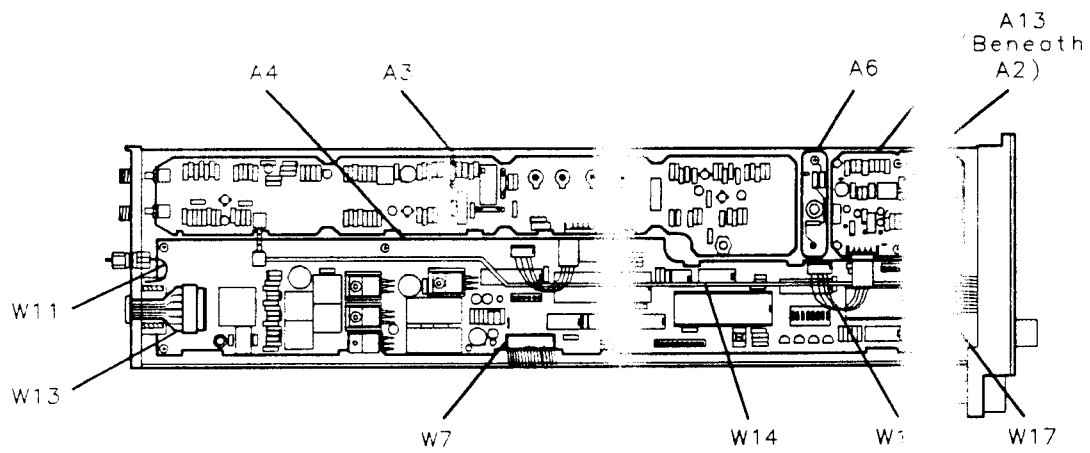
Inside Front-Panel Assembly and Component Locations
